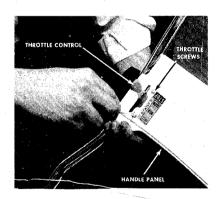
THROTTLE CONTROL ASSEMBLY
